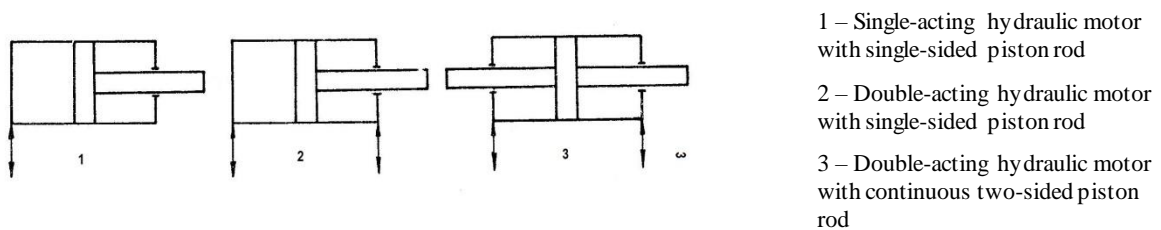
Principles of linear hydraulic motors (hydraulic cylinders)
